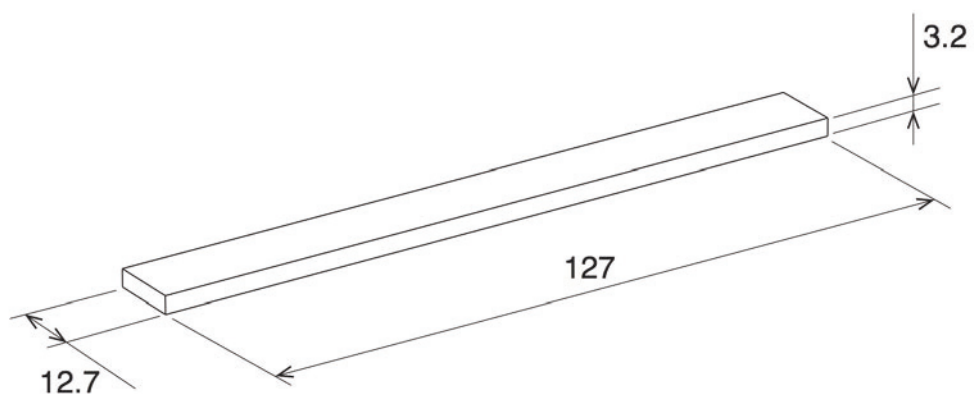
Dimensions of flexural test specimens (all dimensions in mm).
